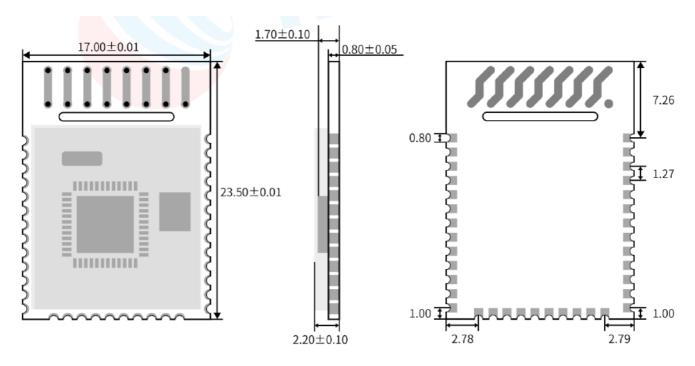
Recommended PCB Footprint of RF-BM-2642B1
